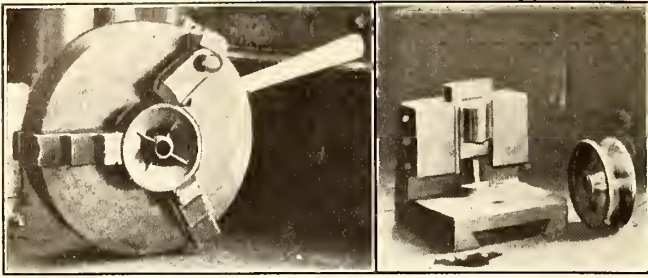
CHUCK WITH ONE LOOSE JAW; FIG. 2—REVERSIBLE TURNING TOOL
